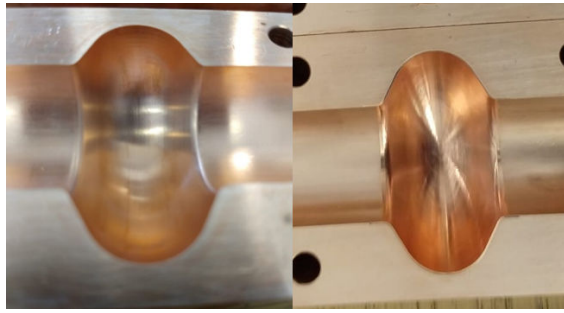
Cavities machined with the initial machining tool and parameters (left) and the second machining tool (right).
